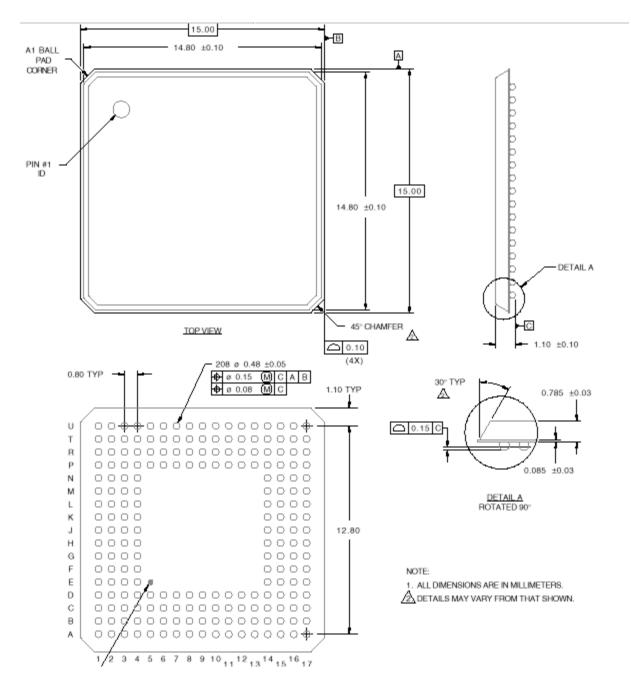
CS22220 208 FPBGA-pin Mechanical Drawing
